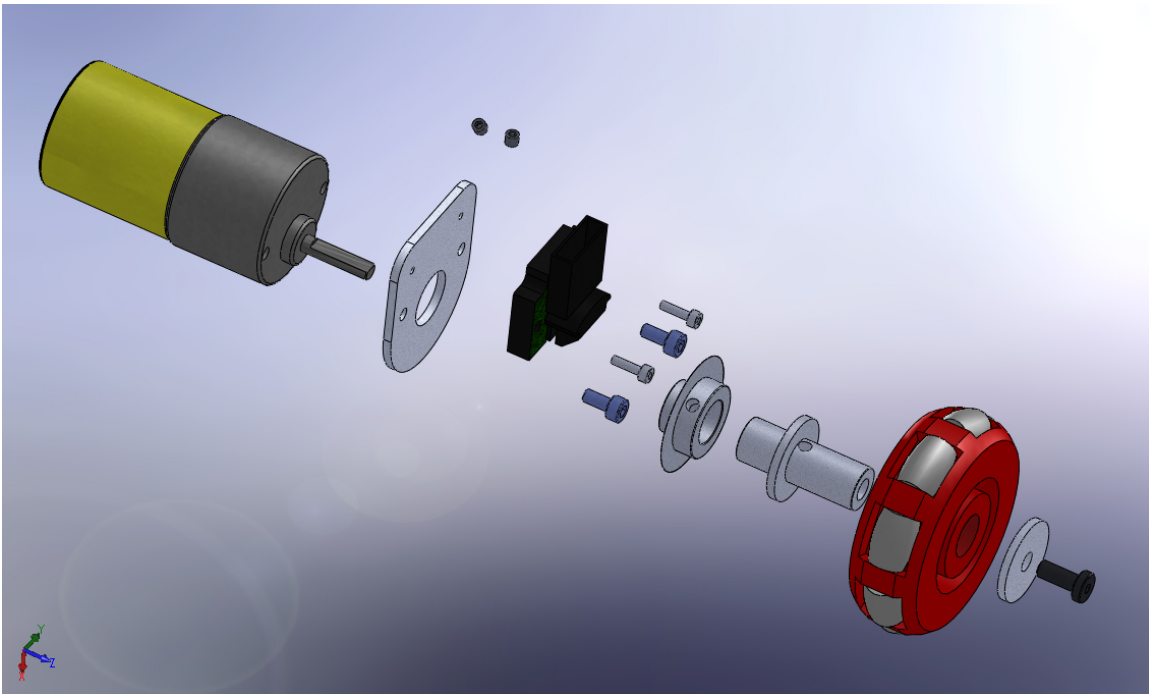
Vertigo 1.0 motor-encoder-wheel exploded subassembly (CAD).
